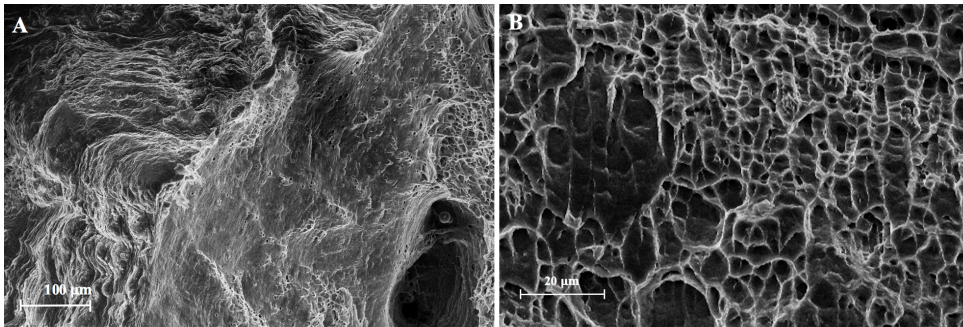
Fracture surface of the pure cast aluminum at A) low magnification B) higher magnification.
